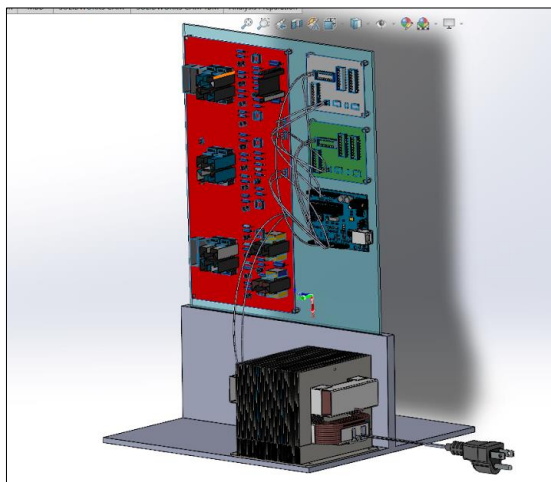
Electrical PCB design with dimensions integrated into Electrical Cabinet designed by Electrical Lead N.I.
